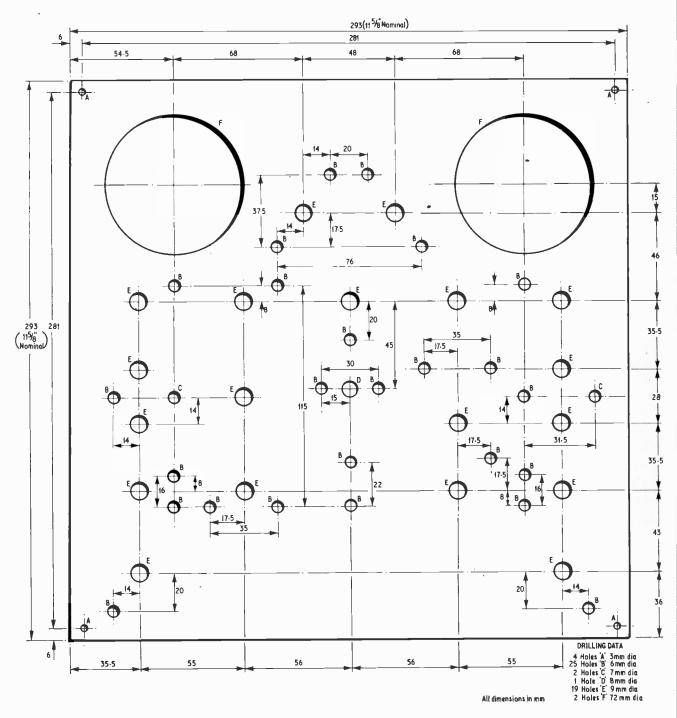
Details of the front panel drilling required for use with scheme shown in block form in Fig. 1.1
